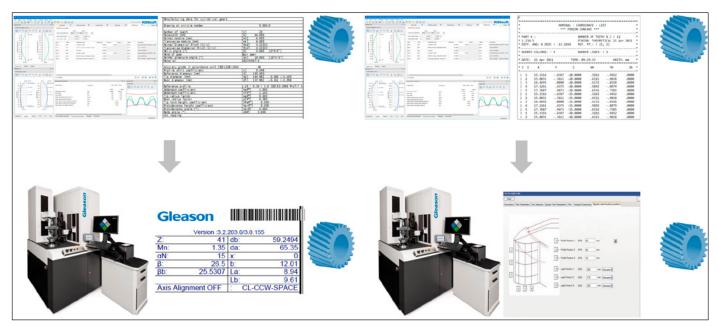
Top: Only gear macrogeometry is transferred from gear design software KISSsoft to GAMA gear measurement software. Bottom: Both gear macro- and microgeometries are transferred.
